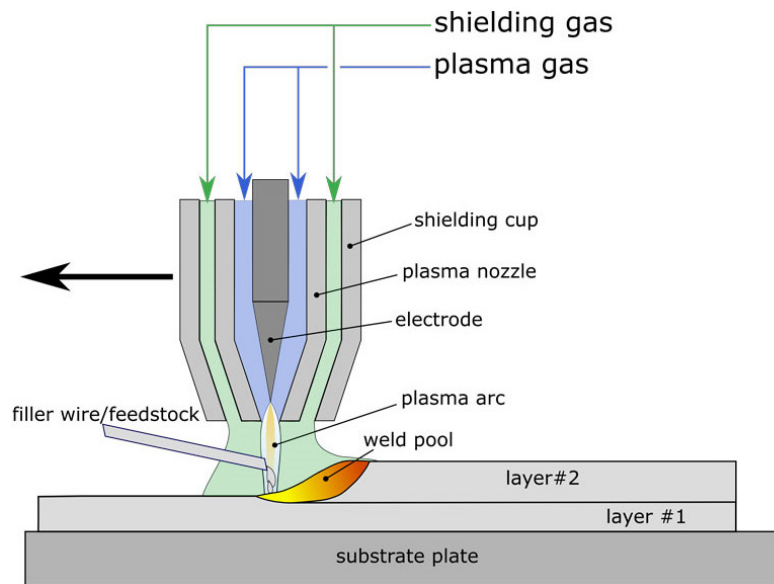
Schematic view of wire and arc additive manufacturing utilising a plasma torch [12]
